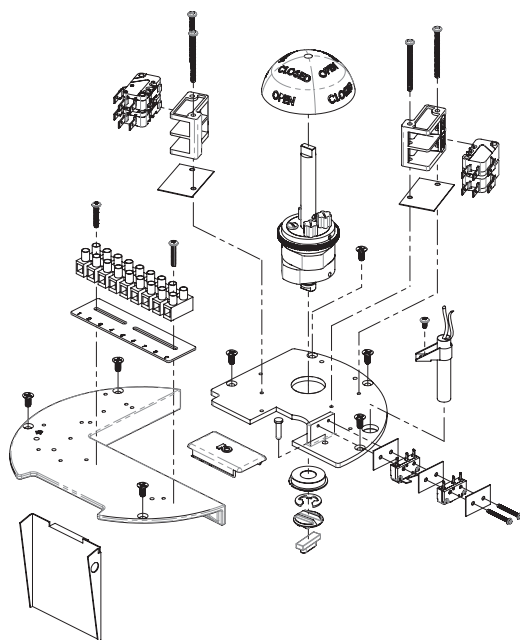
S70, Actuator Size E03, E06, E08 – switch plate removed.
